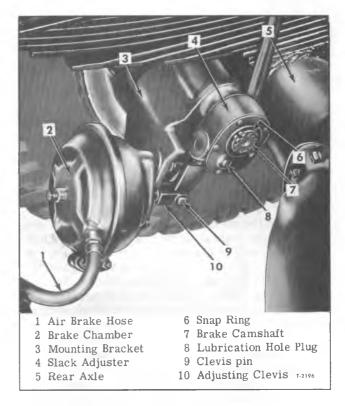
Brake Chamber and Slack Adjuster Installed (Rear)
